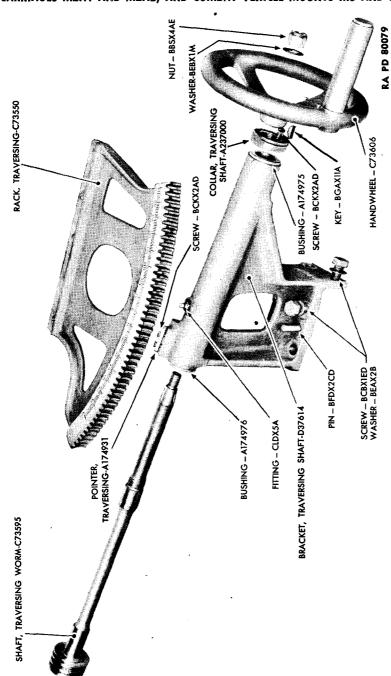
Worm and Rack Traversing Mechanism — Exploded View
